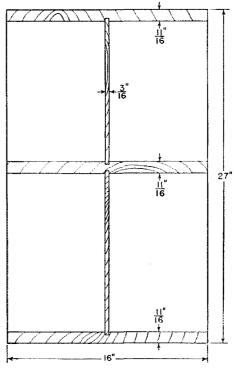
Cross-sectional view and dimensions of the double bookcase.
